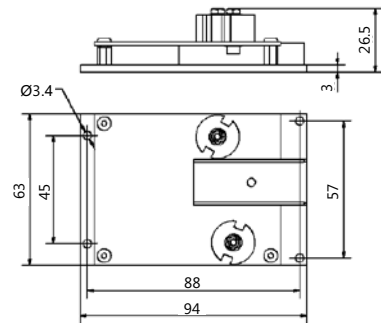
Outline drawing of DPS/DPD series drivers with conductive pad
